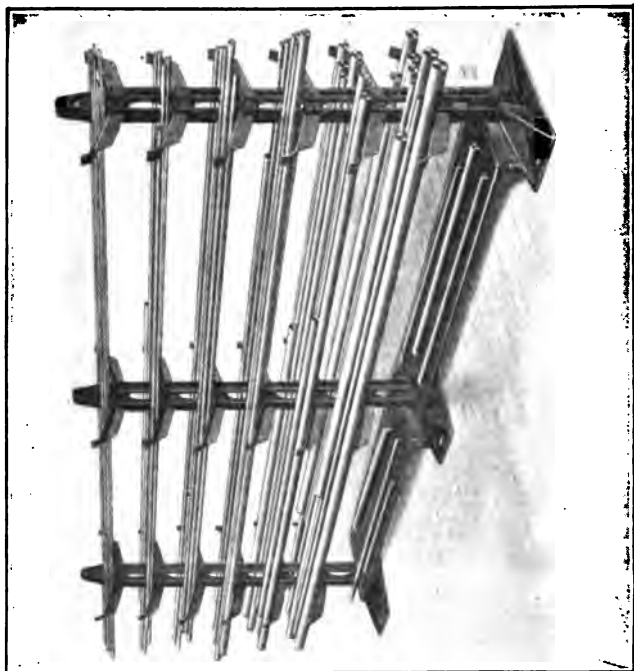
STOCK RACK FOR TUBING, BARS, RODS, ETC.
